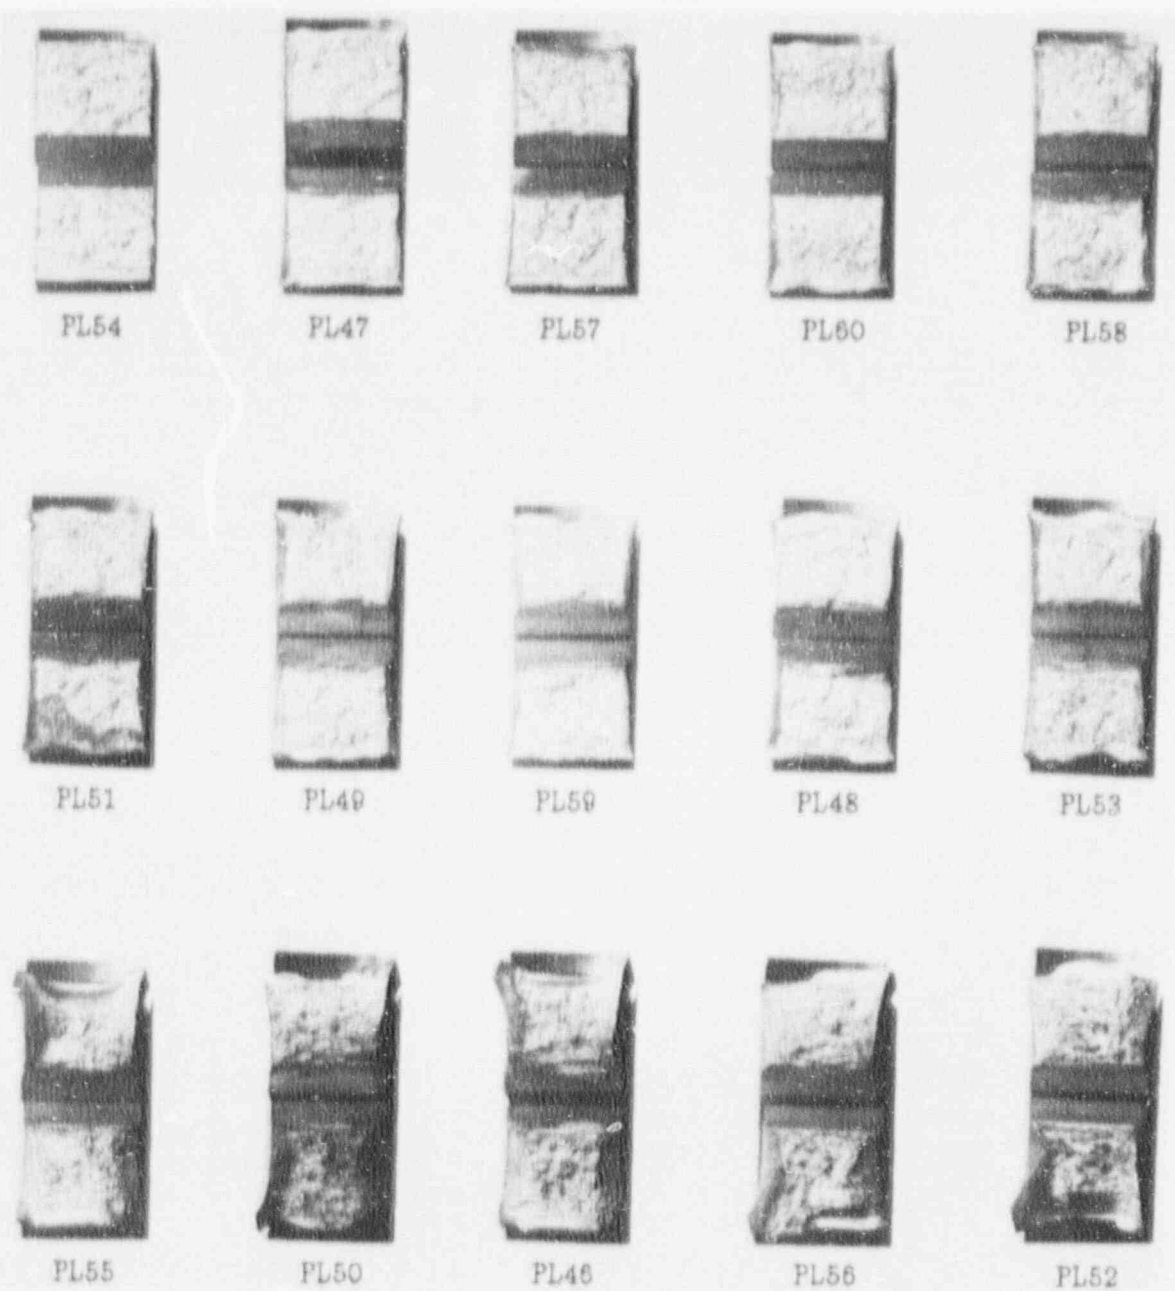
Charpy Impact Specimen Fracture Surfaces for Diablo Canyon Unit 2 Reactor Vessel Intermediate Shell Plate B5454-1 (Longitudinal Orientation)
